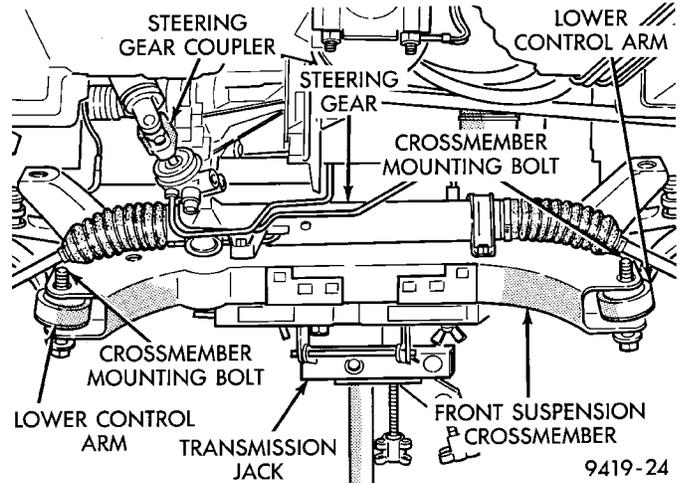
Crossmember Lowered For Removal Of Steering Gear
